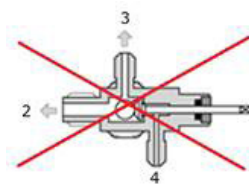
Fig A: Fully opened condition, Port 2 and 3 is fully opened and port 4 is fully closed
